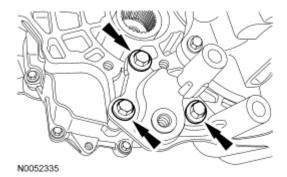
Locating Transaxle Bracket Bolts Courtesy of FORD MOTOR CO.
